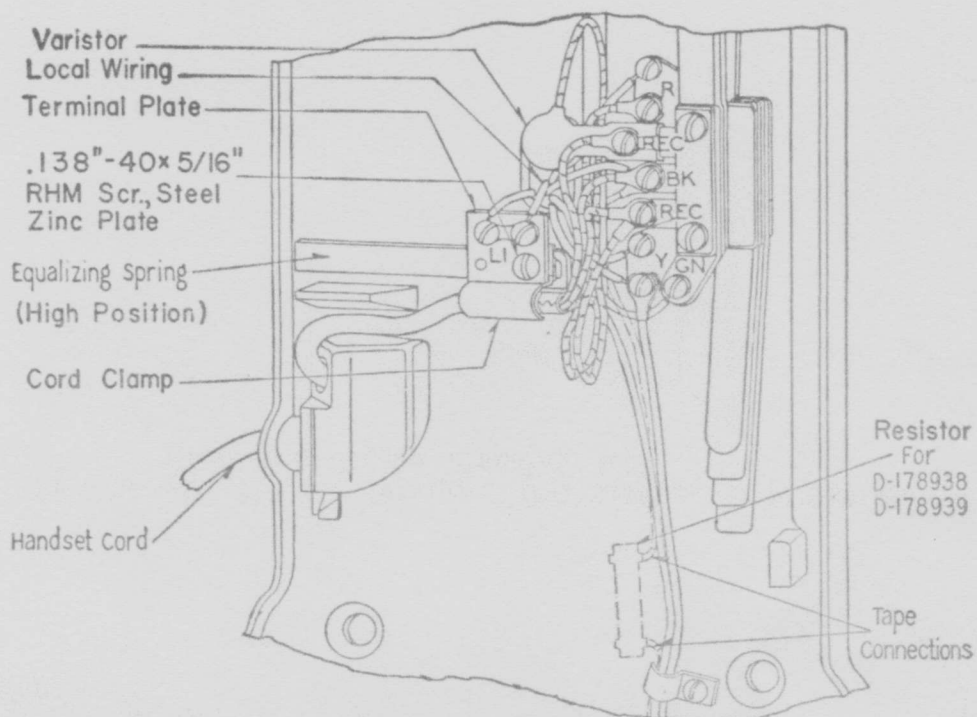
167 or 169-type, D-178938 or D-178939 Coin Collector—Backplate Assembly
